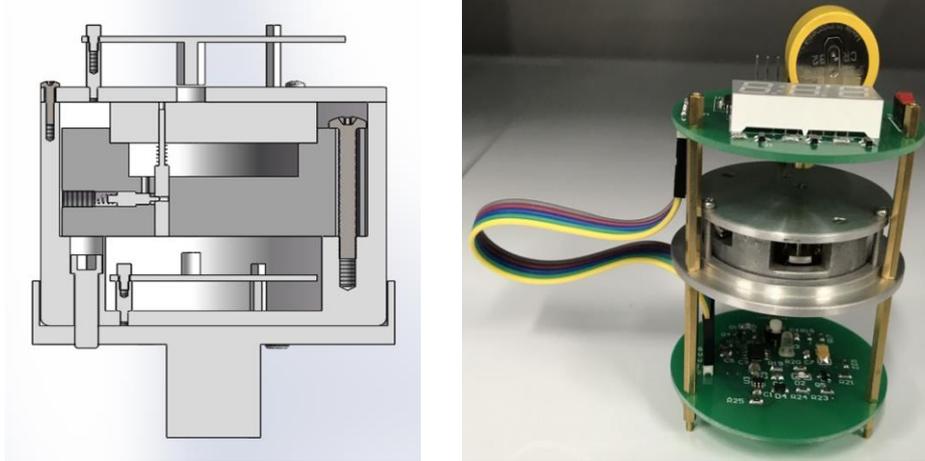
overall assembly diagram of test system Figure 6 assembly diagram of test system
